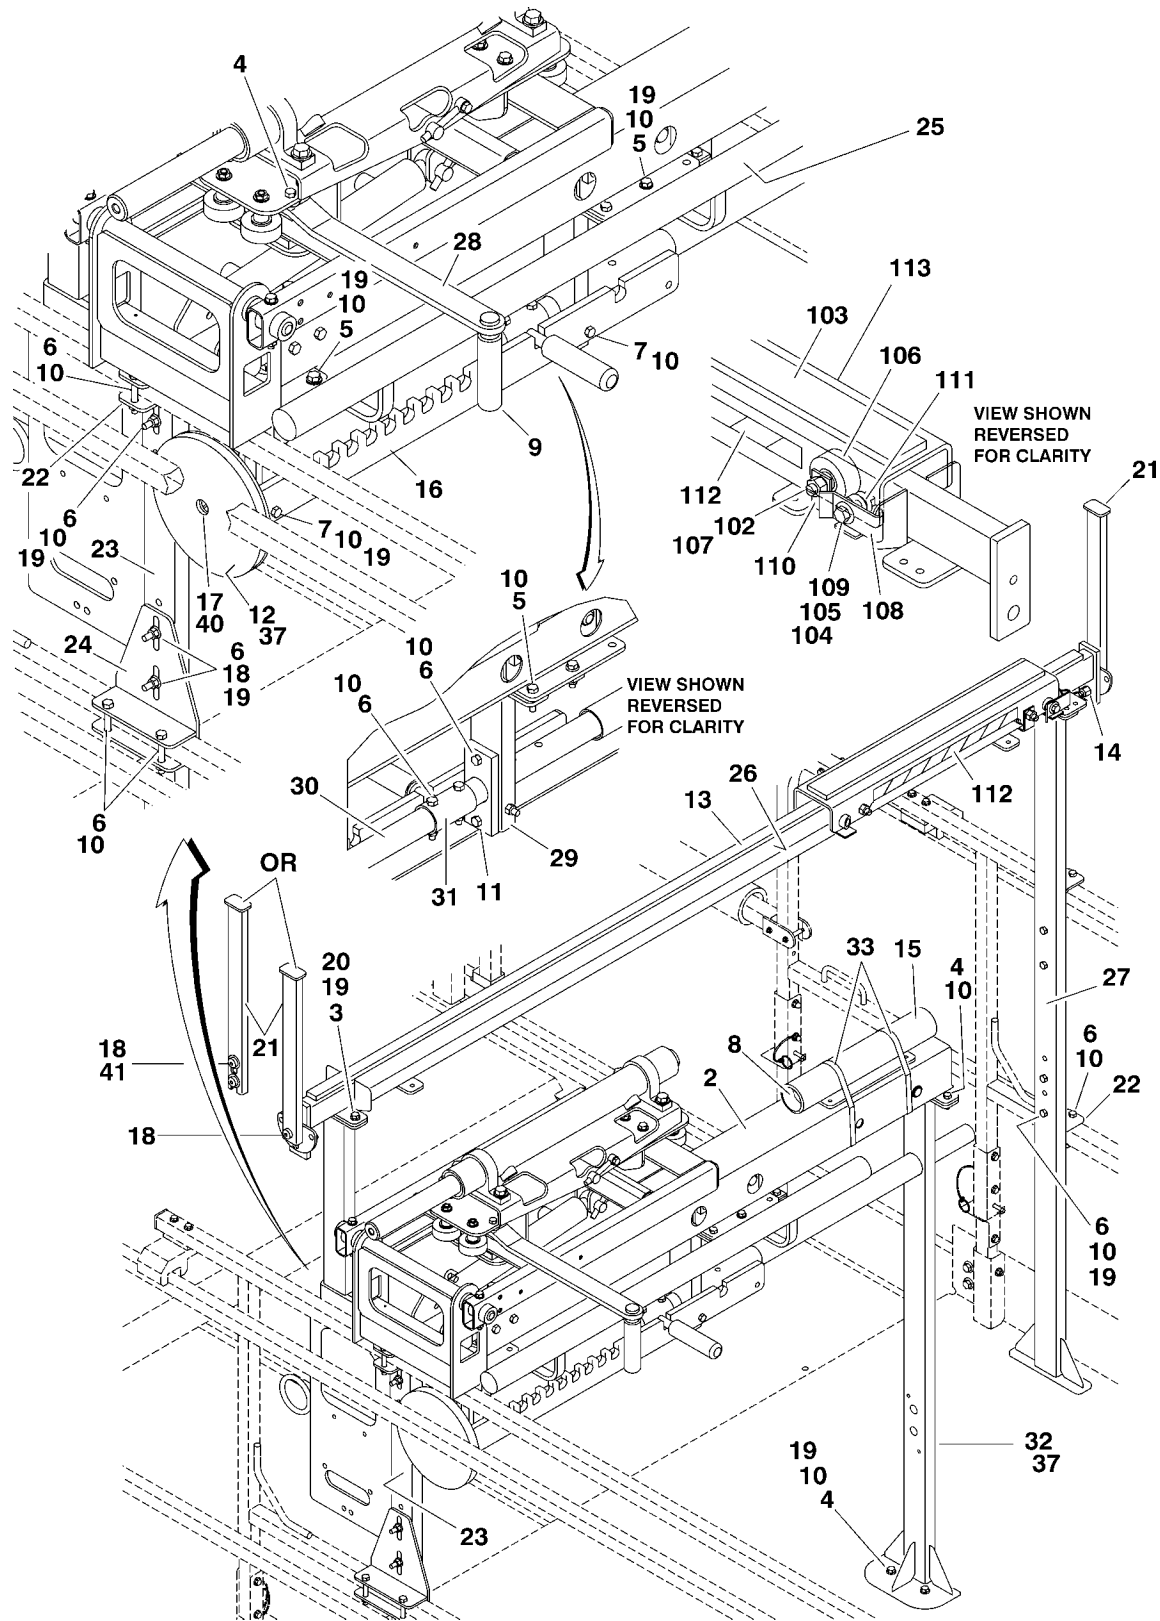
Easi-Cladder™ Plus Base Installation Parts Drawing
